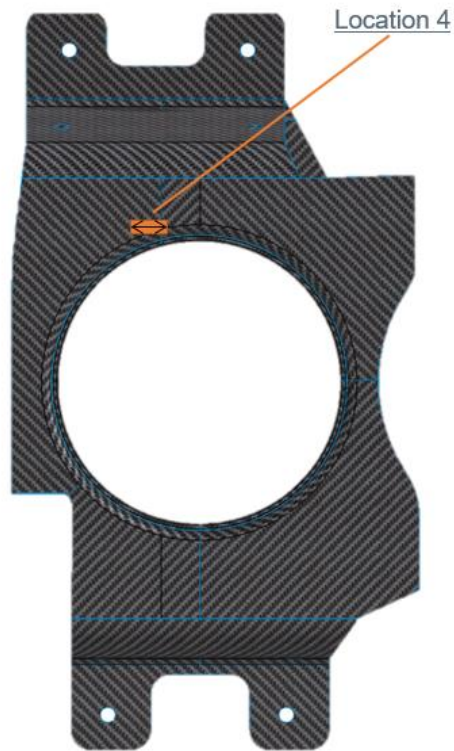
Strain Gauge Locations on Front Upright - Inboard
